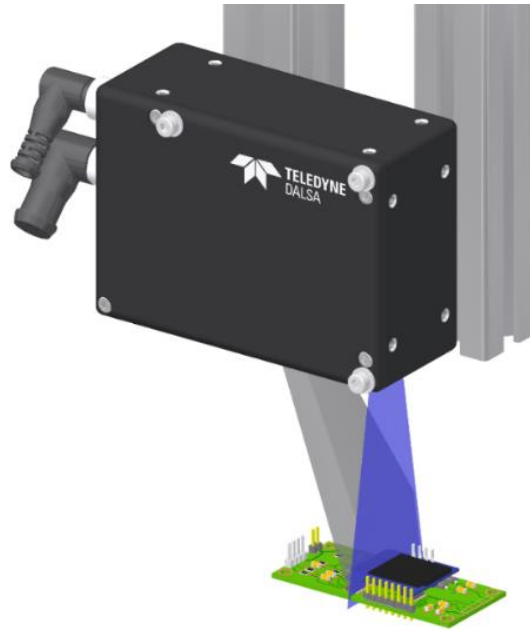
An example of mounting setup. The two metallic mounts will help dissipate heat from the sensor.
